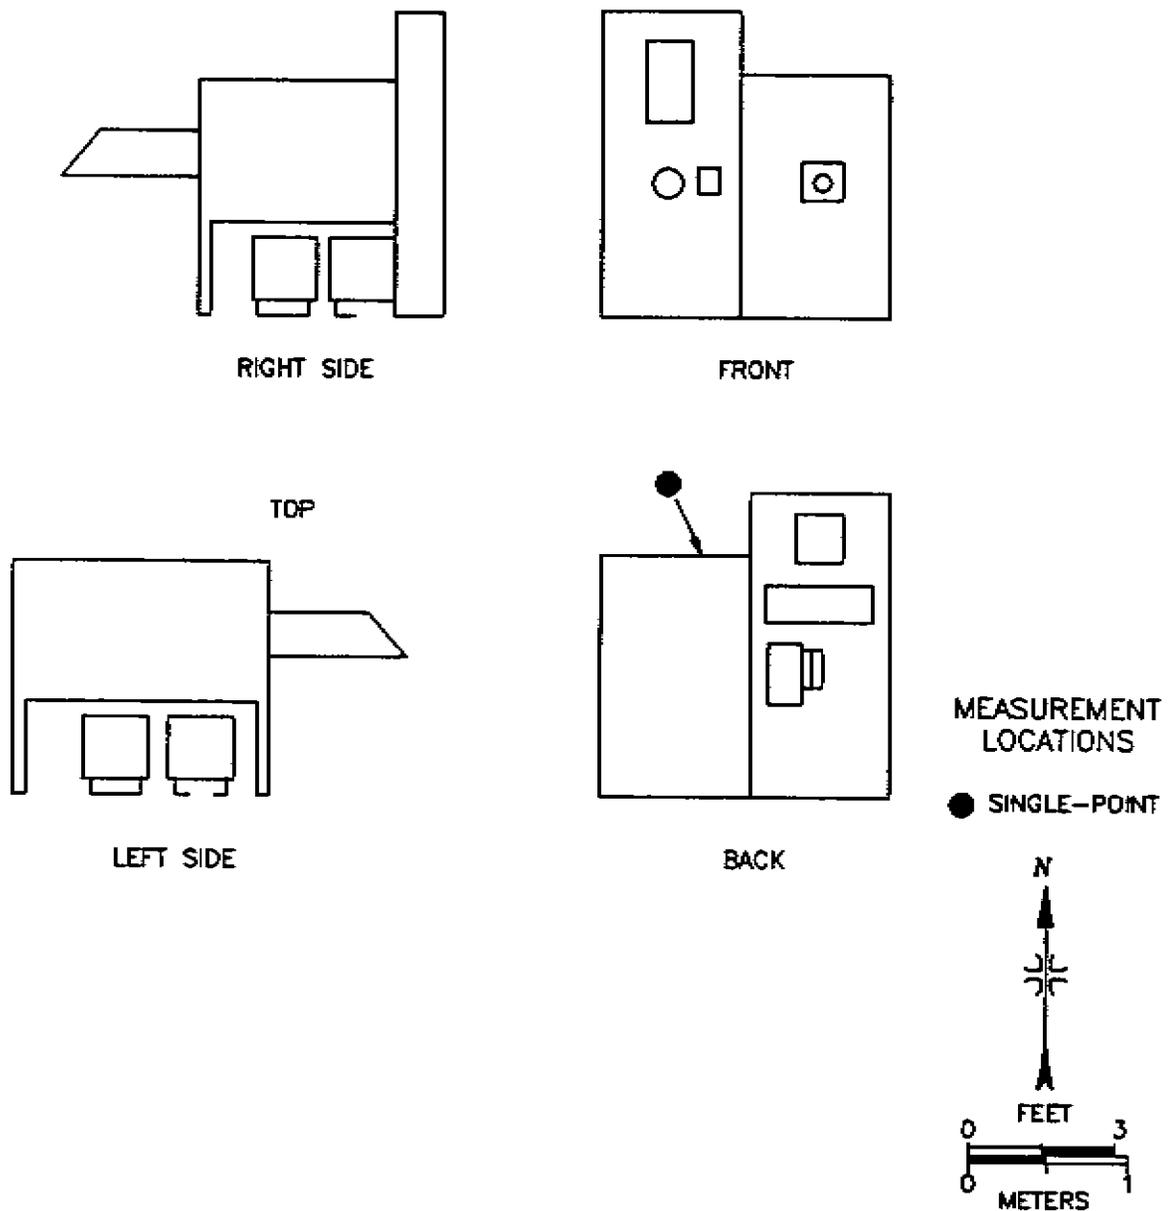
Building 30, Fabrication Room, Hydrogen Oven Equipment #50430, Indicating Measurement Locations
